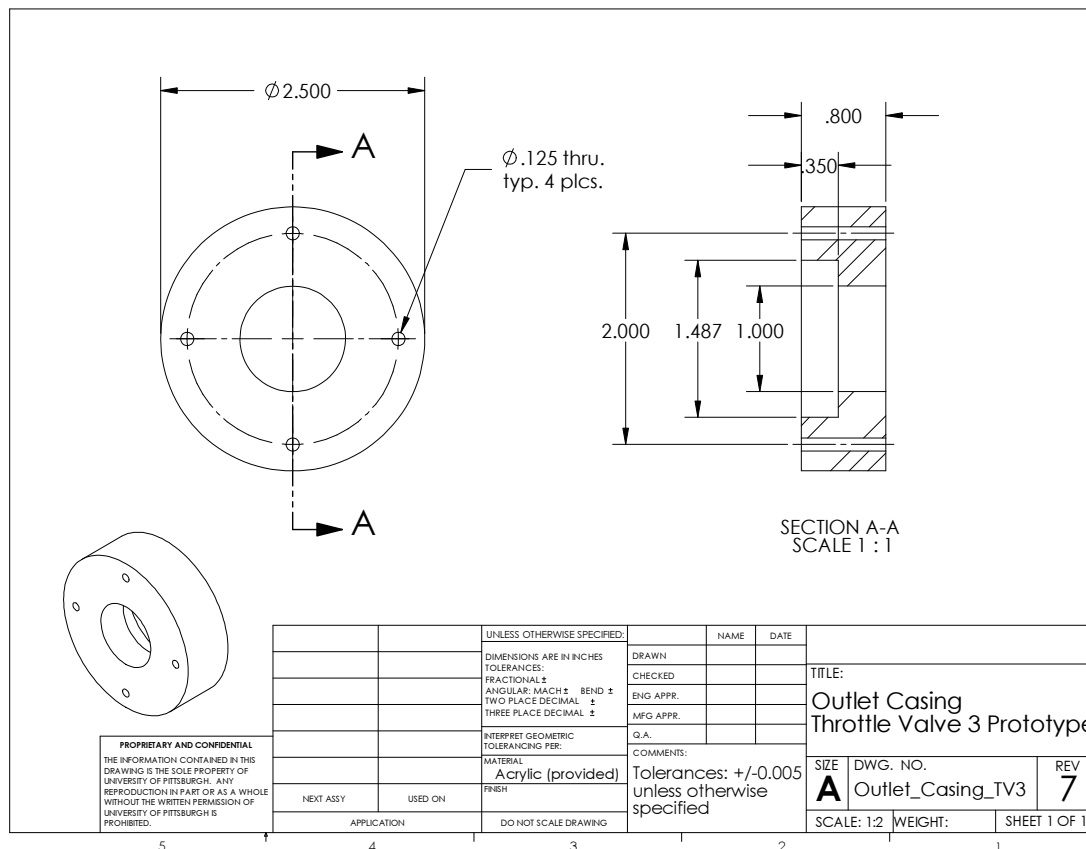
Outlet casing component drawing for split-flow plug valve prototype (TV3).
